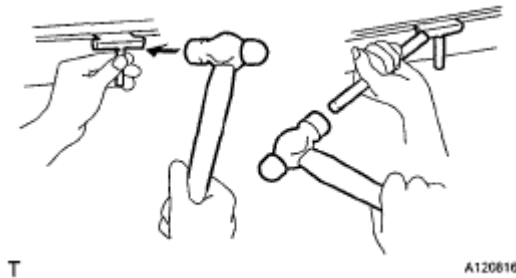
Inserting Blade Of Oil Pan Seal Cutter Between Crankcase And Oil Pan
